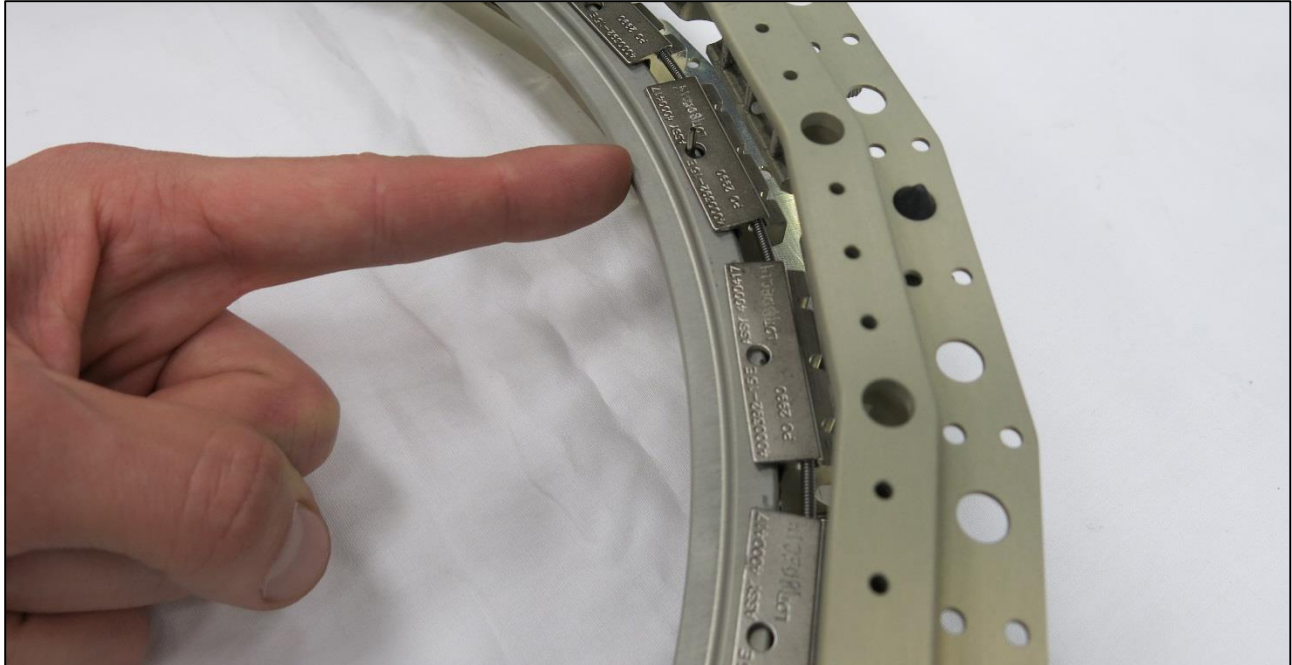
Applying force in radially outward direction during rotation of Ball Screw
